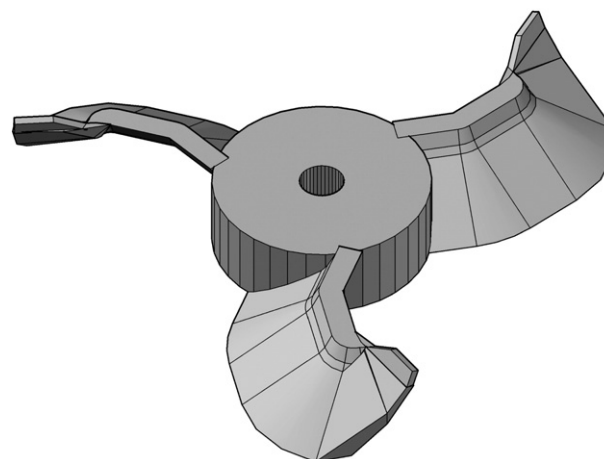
Geometry of the top-driven three-bladed impeller used in the experiments.
